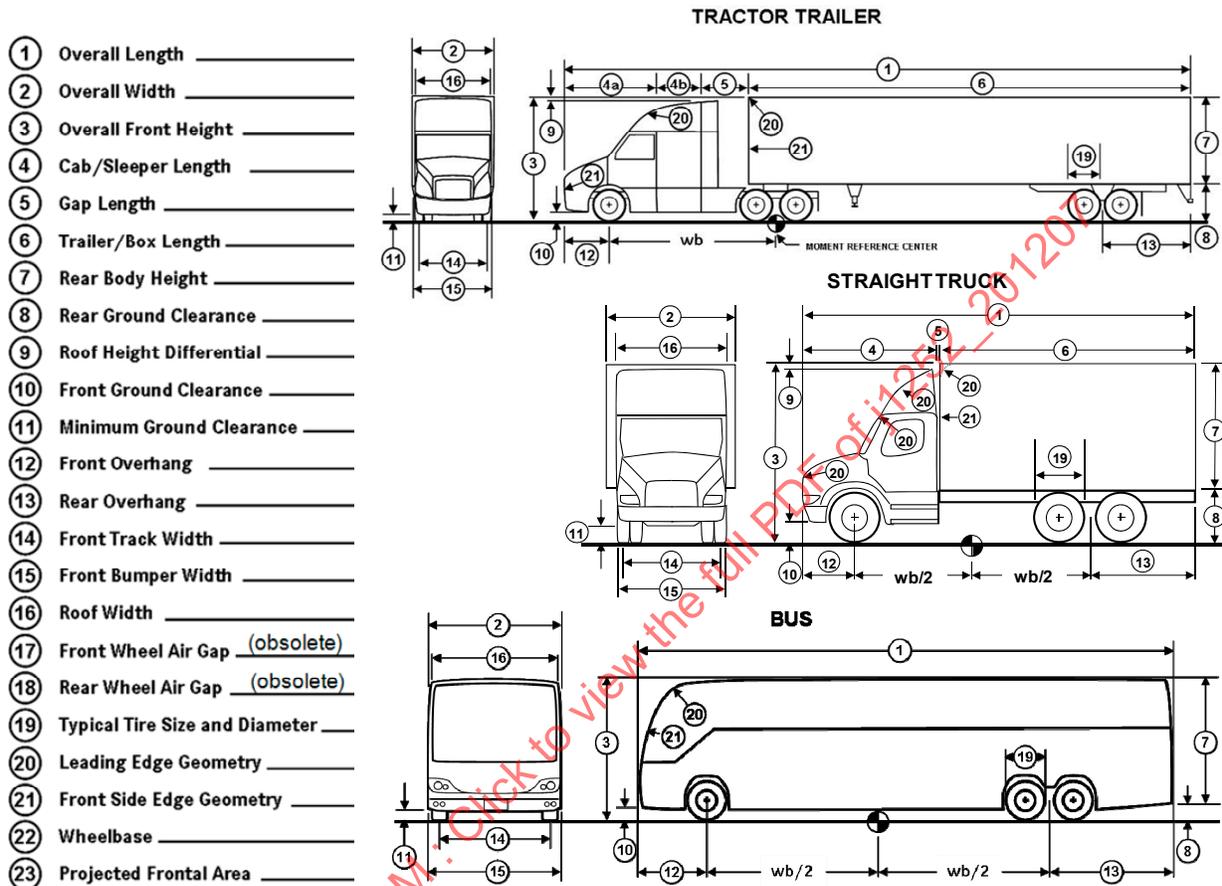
TRUCK AND BUS DIMENSIONS
